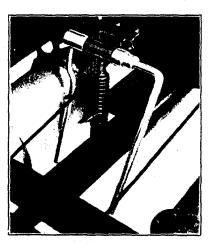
Wrenches 83236 and 83237 for Torque Arm Support
